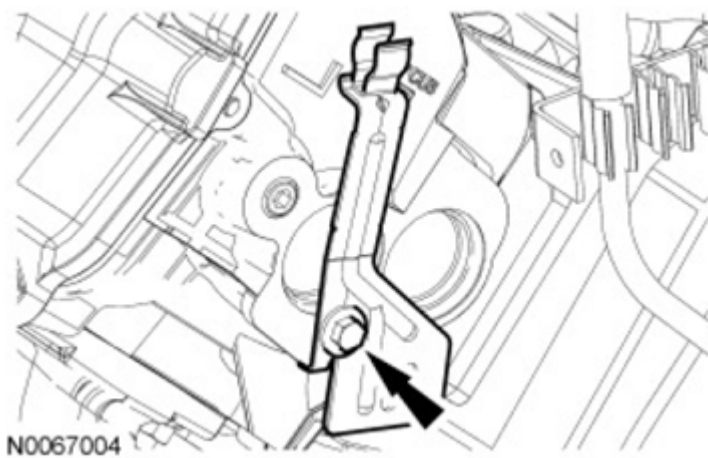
Locating Intake Manifold Vacuum Tube Support Bracket And Bolt
